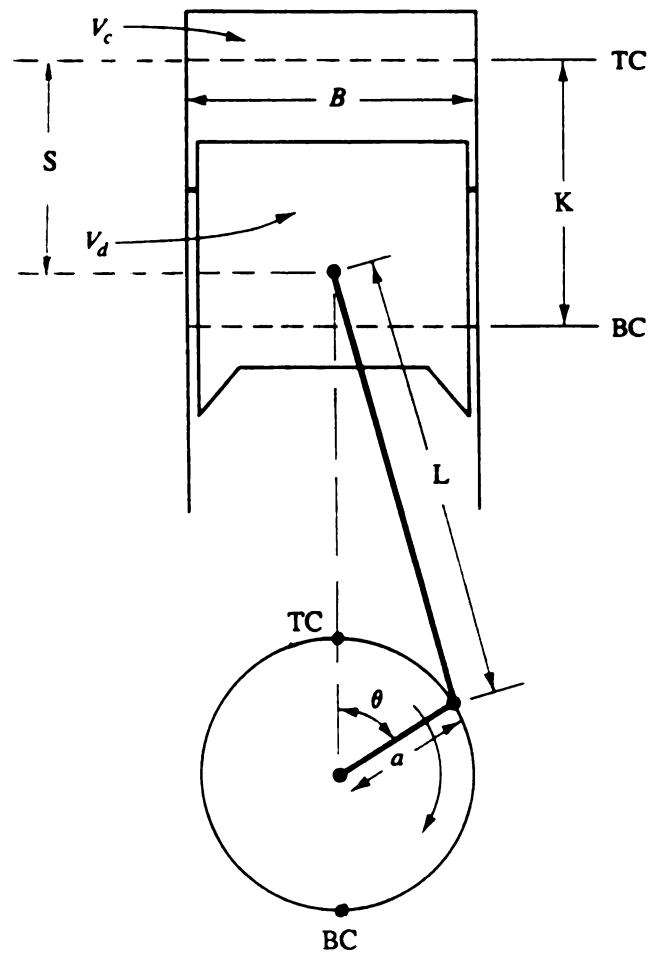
The geometry of a reciprocating piston engine, where B = bore, K = stroke, L = connecting rod length, a = crank radius, θ = crank angle[2]
